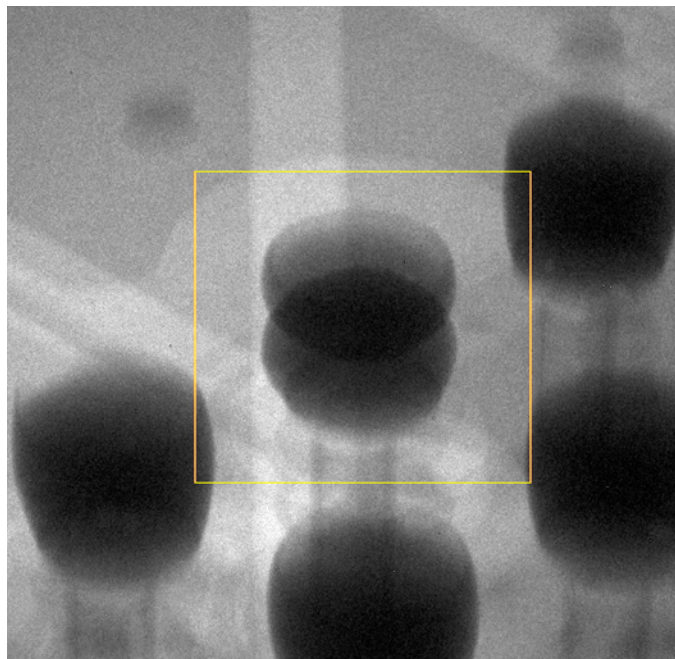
Head-in-pillow BGA defect as detected by X-ray inspection.
